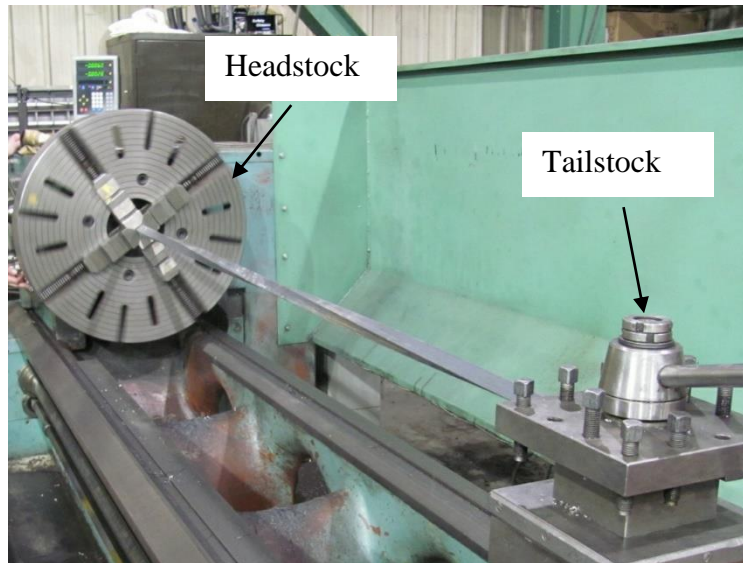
Twisting of the Ransome Bars (Photo Courtesy RMD Engineering Inc.)
